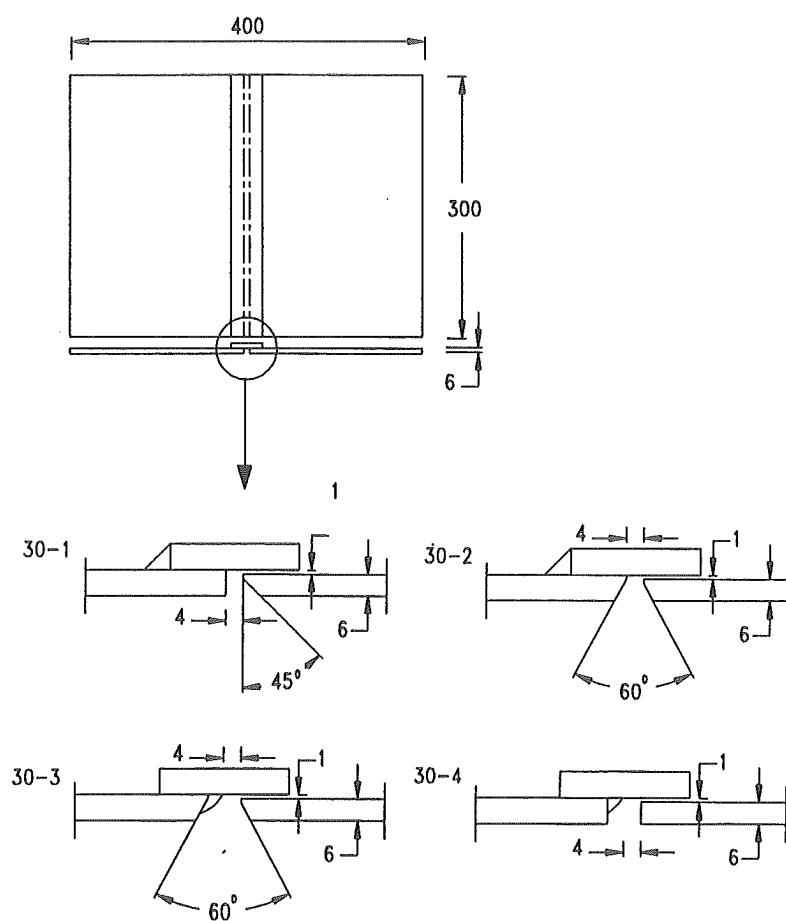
Specimens welding tests stiffener splice joint.
